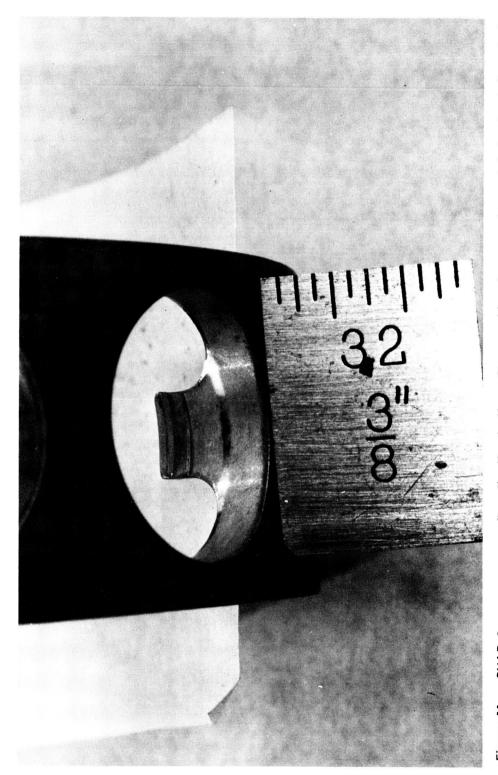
SNAP-8 mercury pump after vibration testing. Pump end bearing separator pocket showing ball contact pattern.
